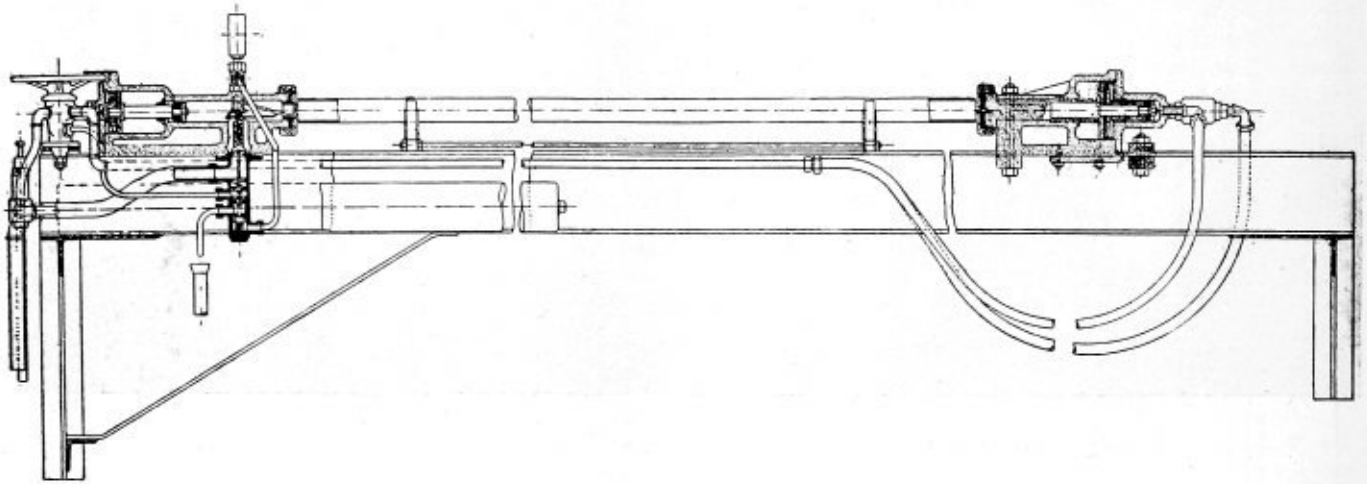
Machine Used for Testing Safe Ended Tubes and Flues
